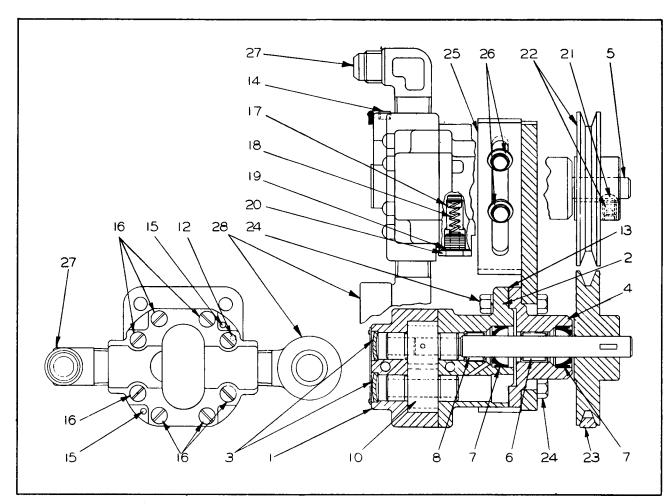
CONVERTER PUMP MOUNTING & DRIVE GROUP - USED TL-10 #256 THRU #970
